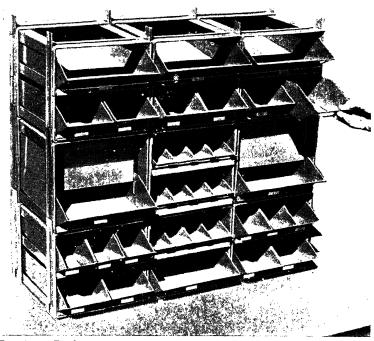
Bank of containers. The type of gravity containers shown can be used both for storing parts before assembly and for dispensing them at assembly. The rack shown keeps the containers in order during storage (see Fig. 320). (Gordon L. Hall.)
